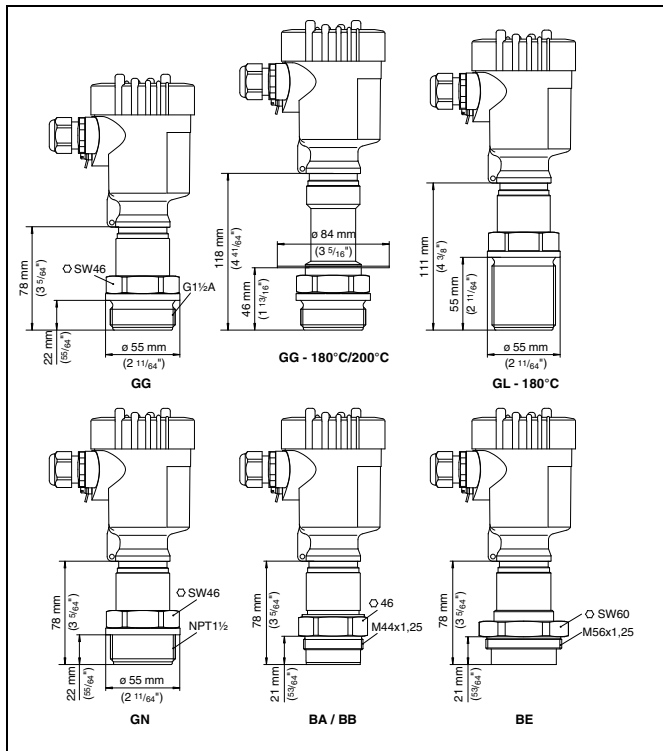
VEGABAR 65 - threaded fitting: GG = G1½ A, GL = G1½ A thread length 55 mm, GN = 1½ NPT, BA/BB = M44 x 1.25; BE = M56 x 1.25
